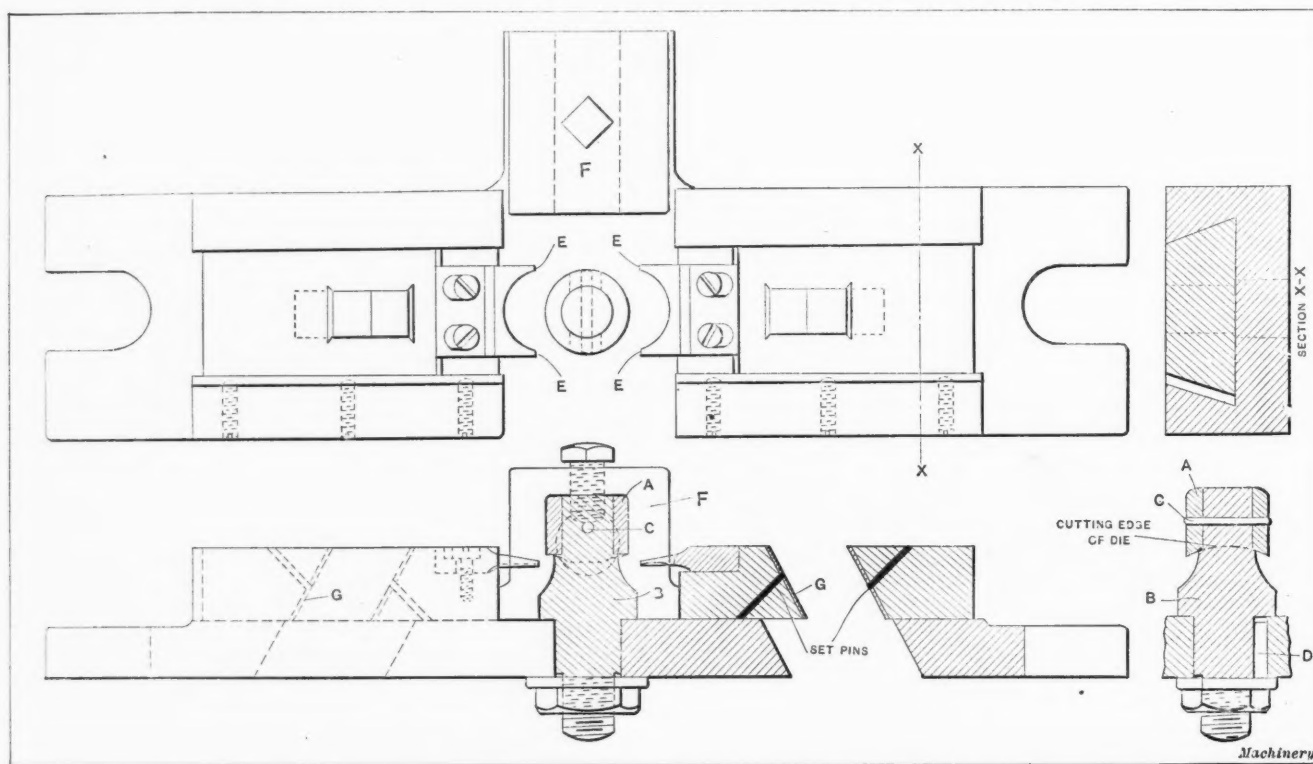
Die-bed equipped with Tools for clipping Shell shown in Fig. 1
